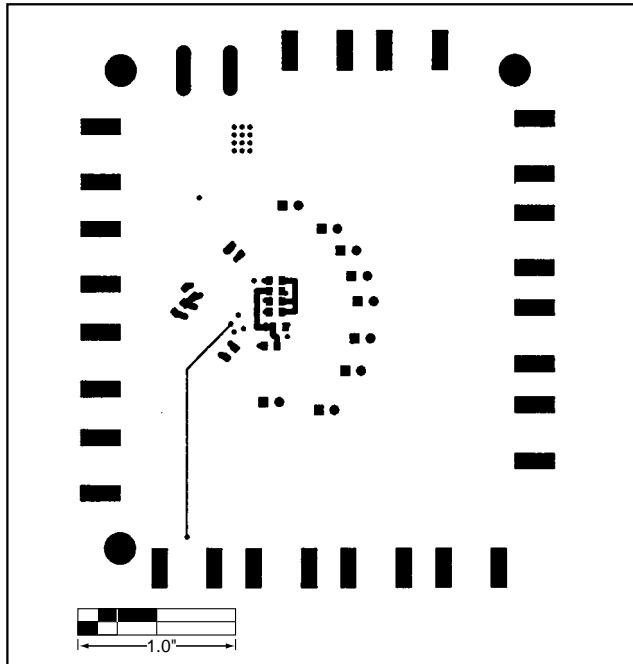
MAX3680 EV Kit PC Board Layout—Solder Side
